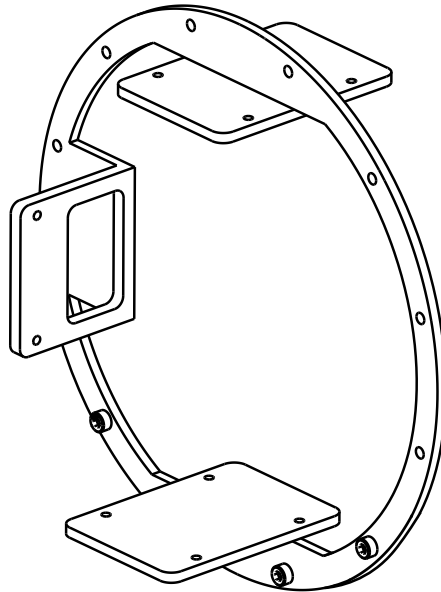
Drawing of the frame for TPEN, showing the two motor mounts (top and bottom).
